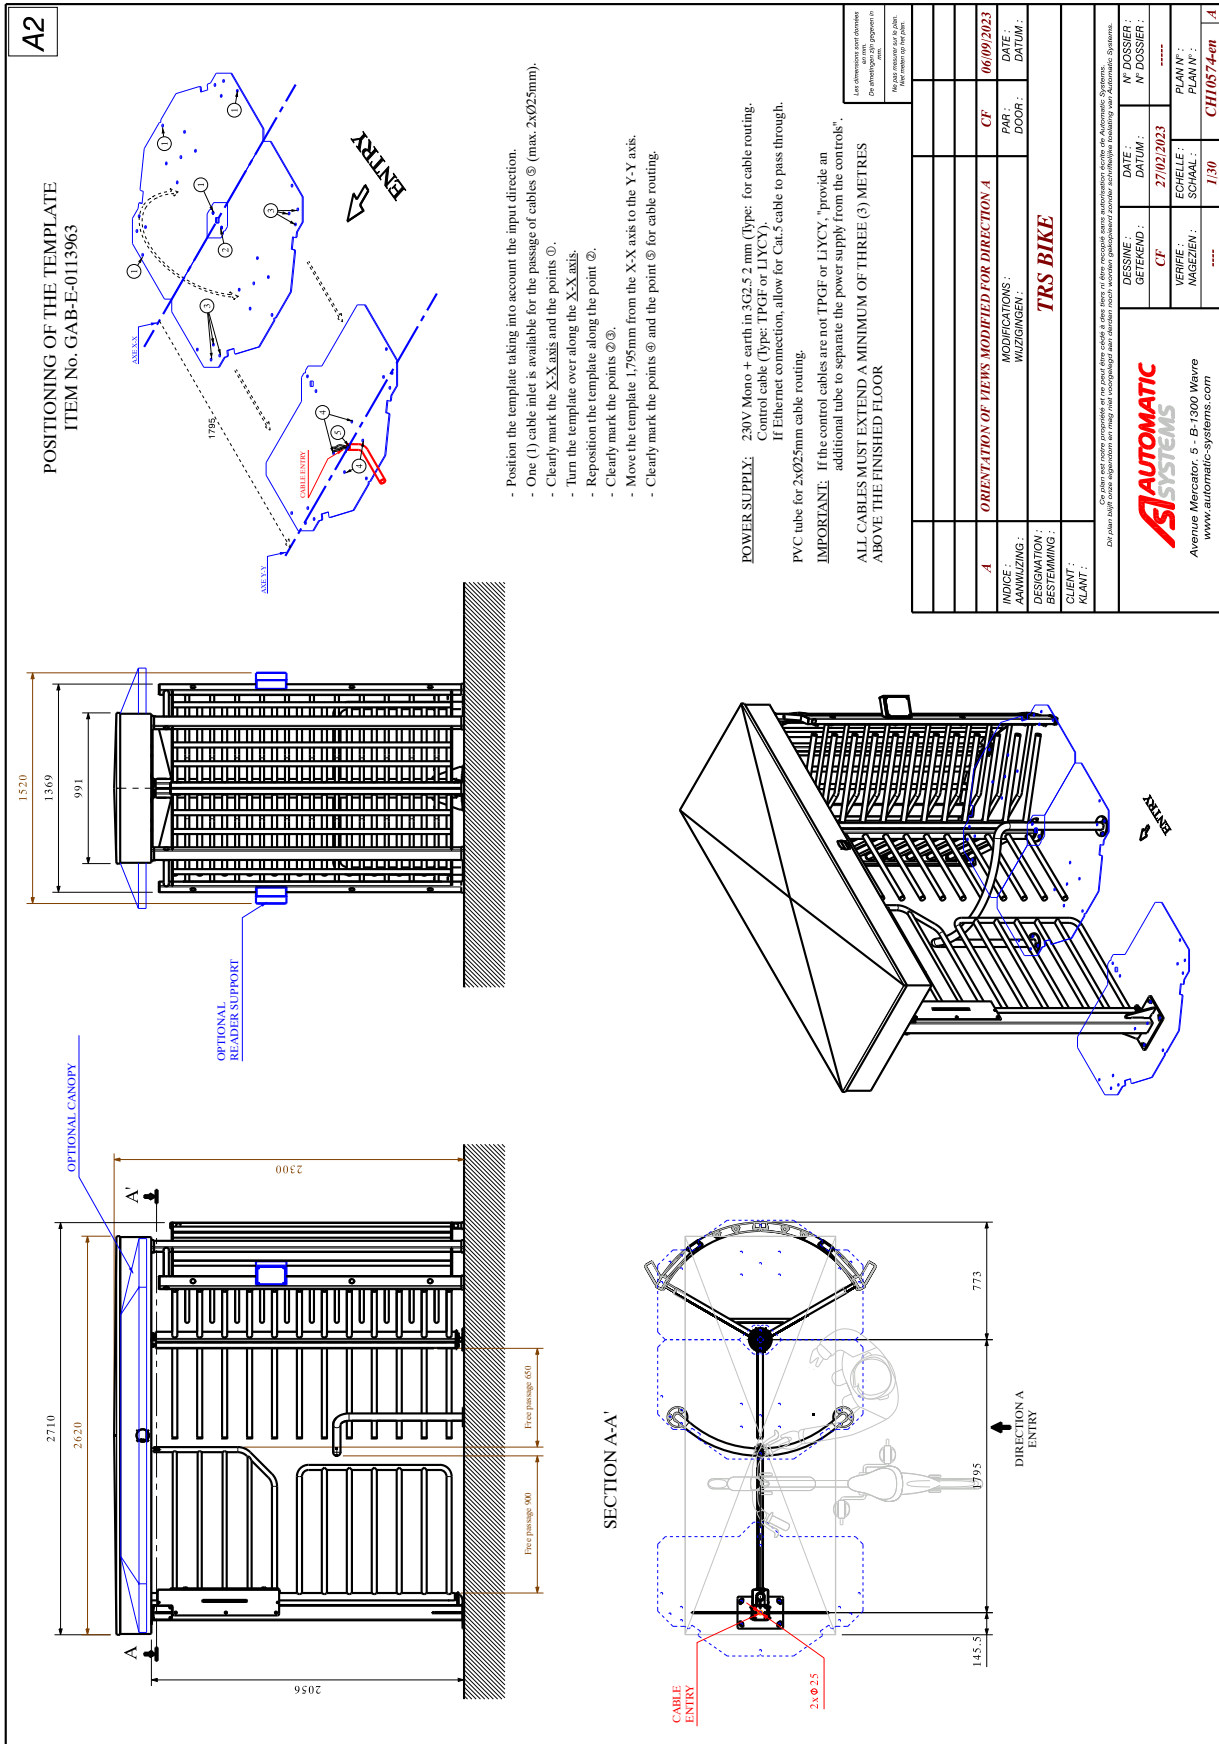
TRS BIKE installation plan - Fixing to finished floor
